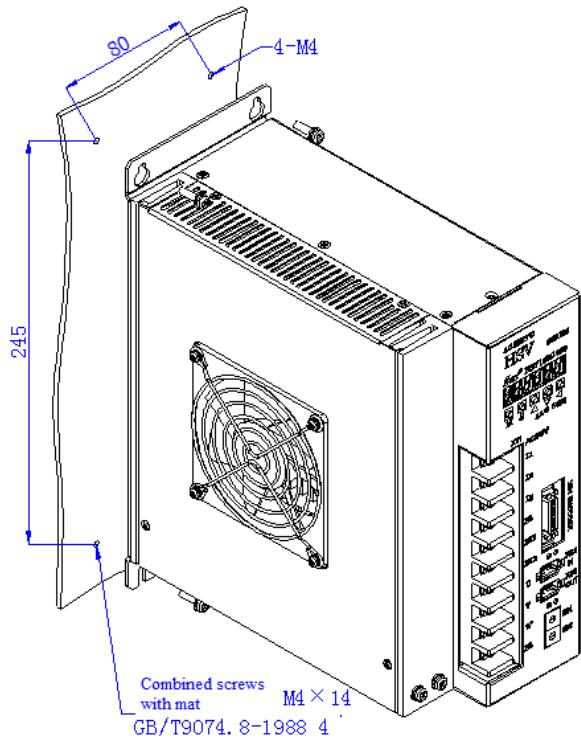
Installation diagram of HSV-160U-050,075 on a baseboard (Unit: mm)
